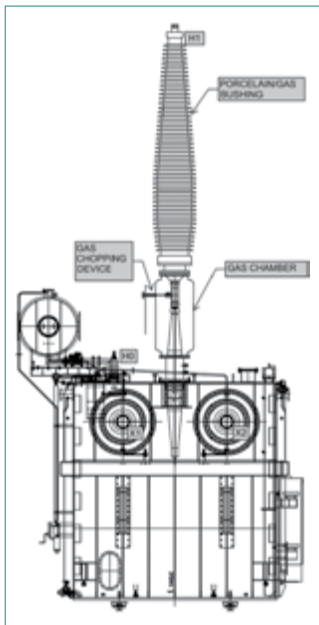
Transformer assembled with chopping device and porcelain bushing.
